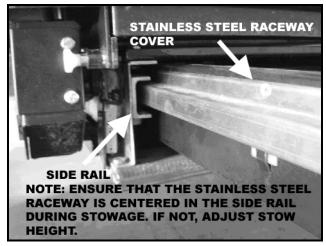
STOW HEIGHT ADJUSTMENT DETAIL
